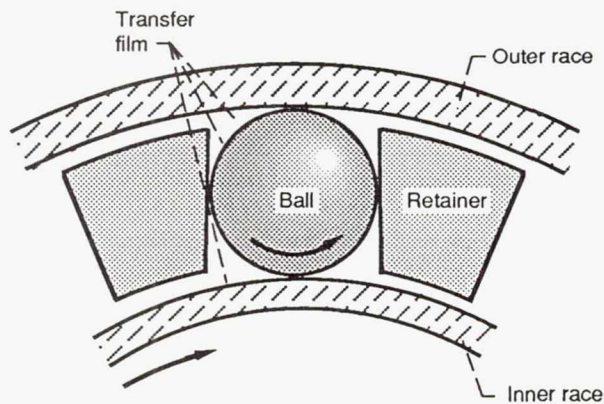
Illustration of ball bearing film-transfer mechanism (Ref. 17).
